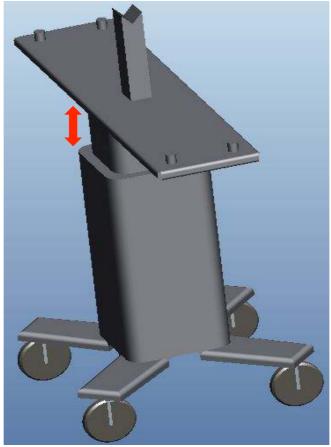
Concept design of the movable fixture for the VIP-cross member subassembly line
